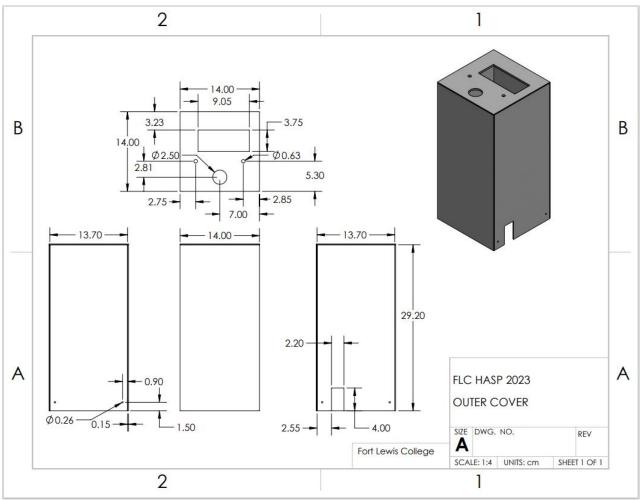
Outer Cover with Mounting Holes, Geiger Slot, and Camera Slot (All dimensions are in cm).
